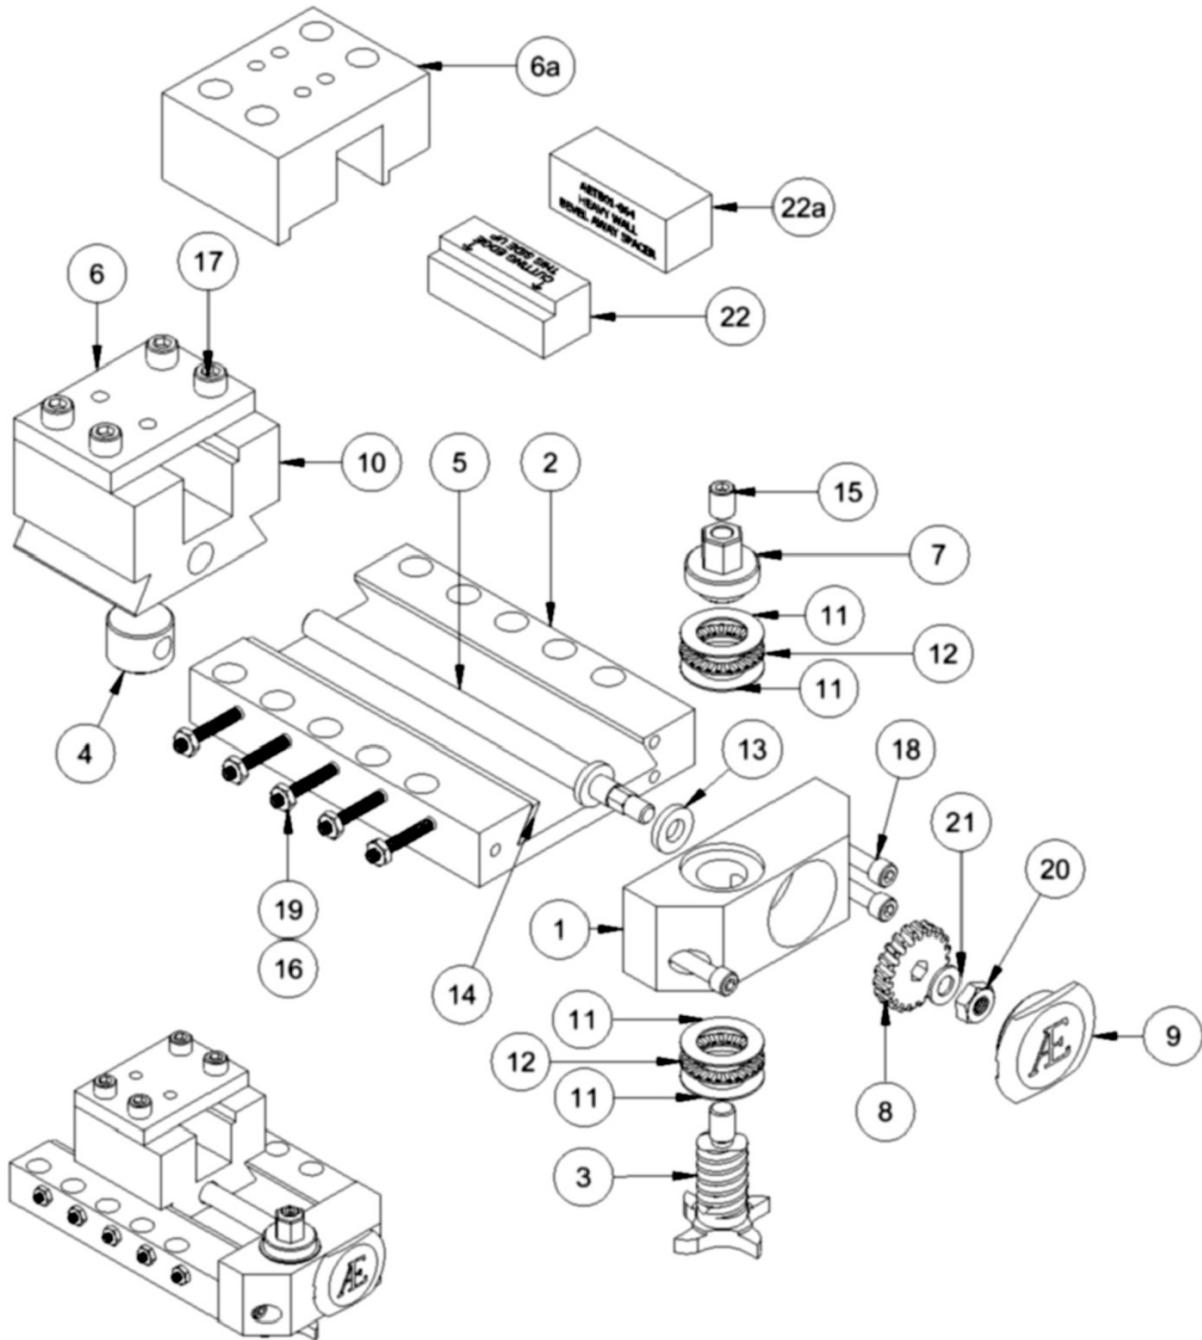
Heavy wall 6" tool slide assembly TS01-6001
